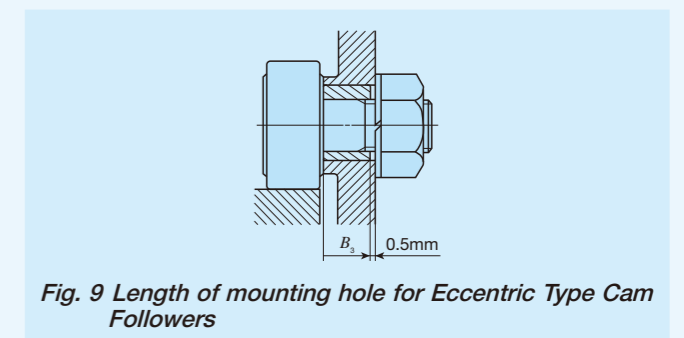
Length of mounting hole for Eccentric Type Cam Followers
